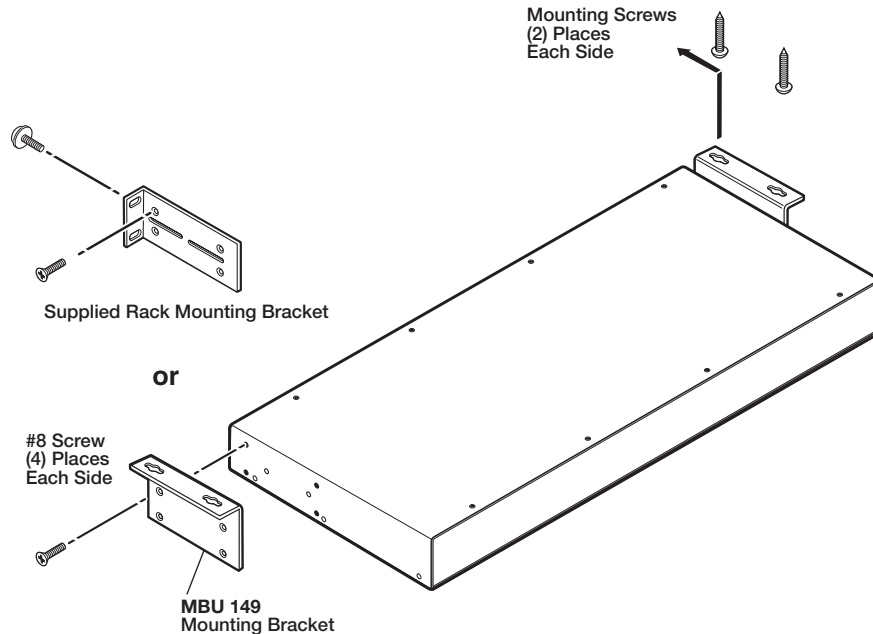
Mounting the DMP 128 on a Universal Rack Shelf
